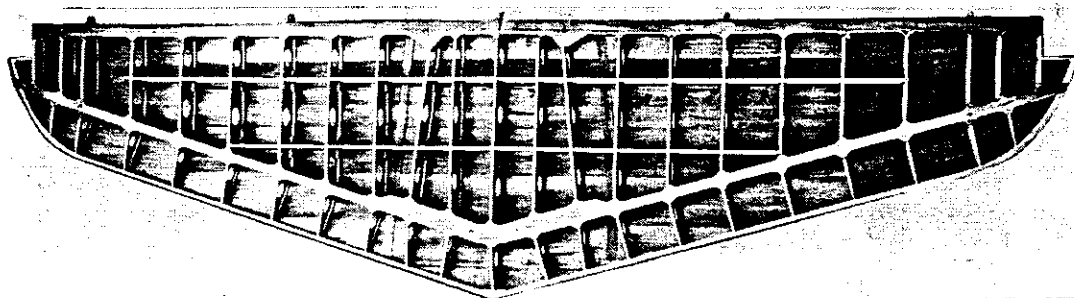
Wood stabilizer, one side of skin removed to show interior construction.
